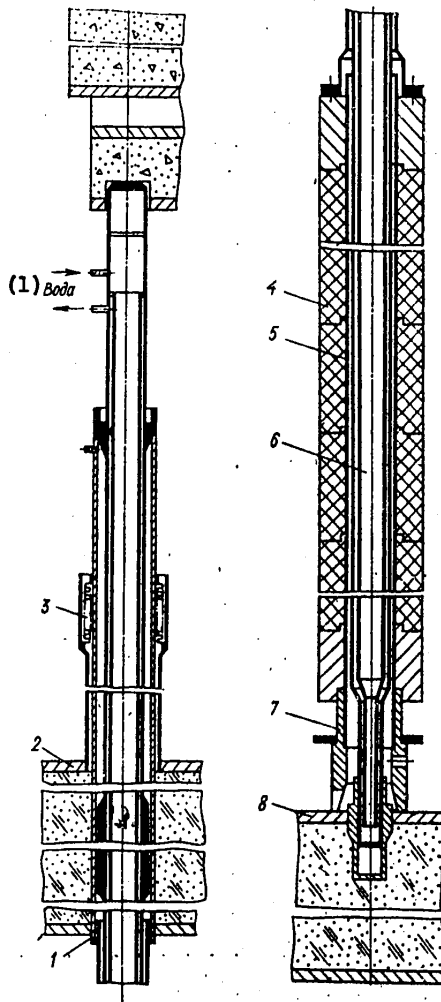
Reflector Cooling Channel: 1--loop sleeve; 2--upper assembled steel section; 3--bellows compensator; 4--side reflector; 5--rod for attaching side reflector; 6--Field pipe; 7--sleeve; 8--lower assembled steel section
